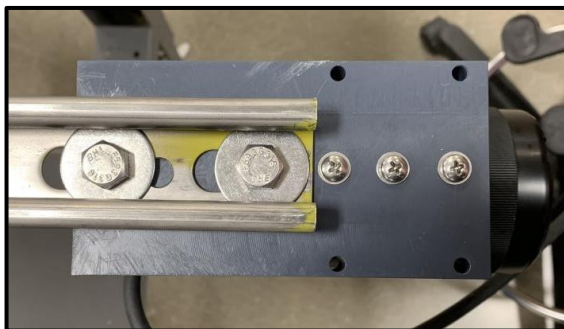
Bottom view of mounting block connected to the end of the Unistrut arm.
